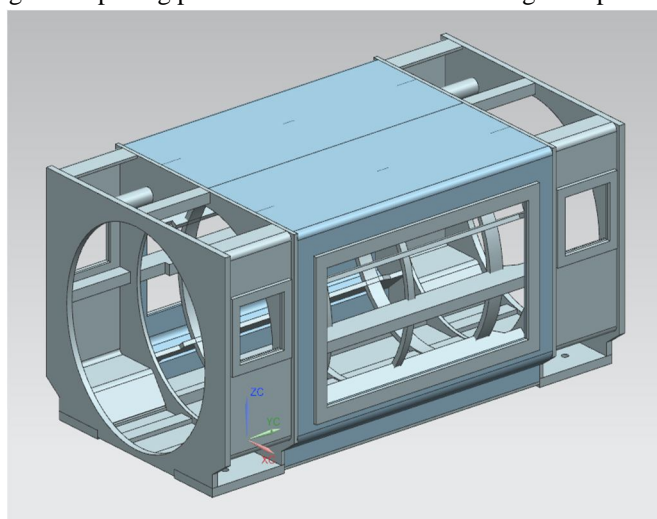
New Stator Frame of 450 shaft height CACA motor
